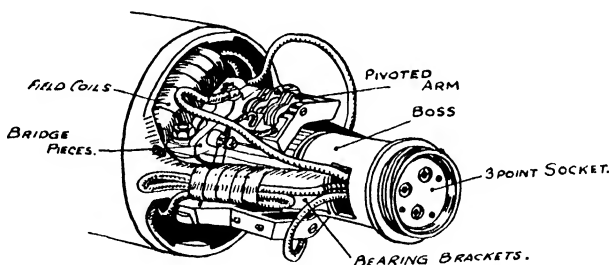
GENERATOR WITH REAR SPINNING REMOVED
